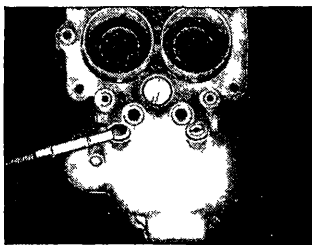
Remove both nozzle plugs, nozzle retainer plugs and nozzles. See that nozzle gaskets are removed from casting
